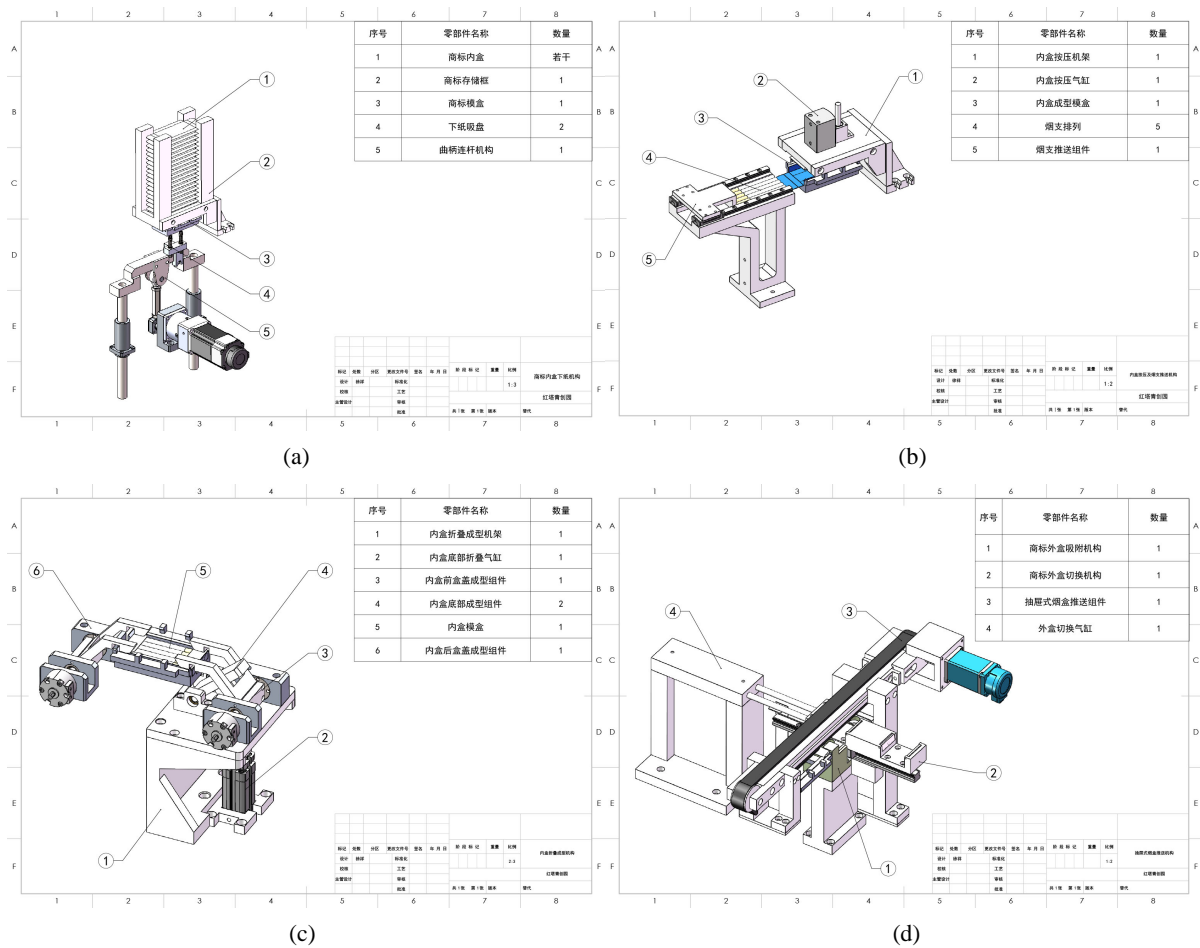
Composition of the experimental platform for drawer type cigarette packaging molding
